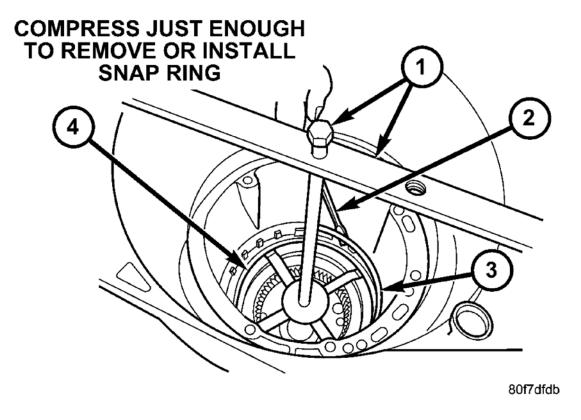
Compressing 2/4 Clutch Courtesy of CHRYSLER LLC
